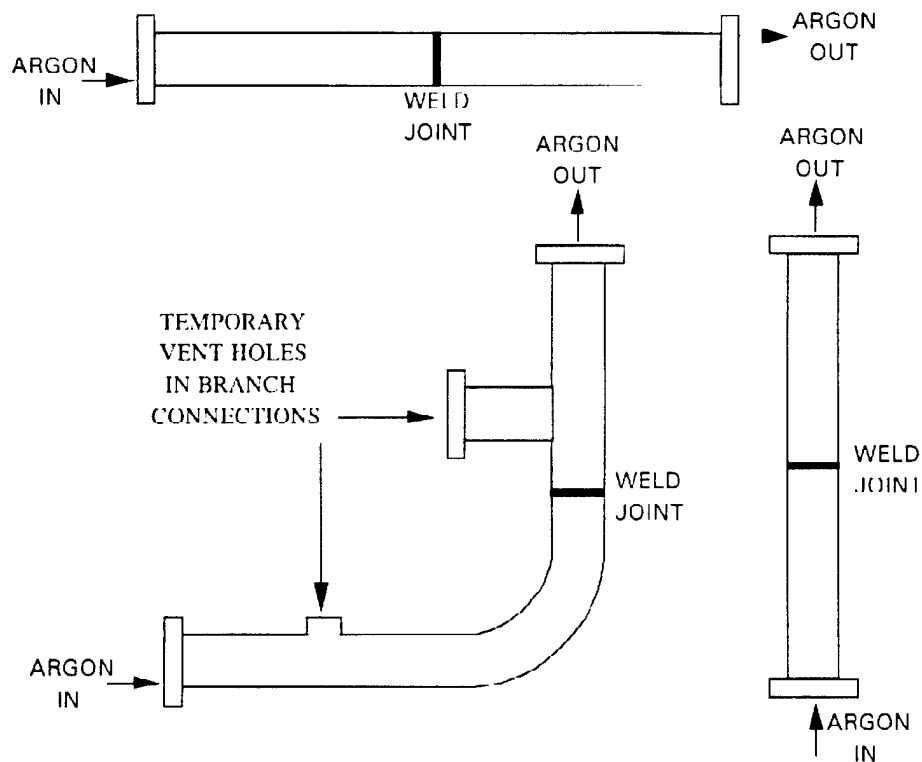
Pre-weld purge inlet and outlet locations.
